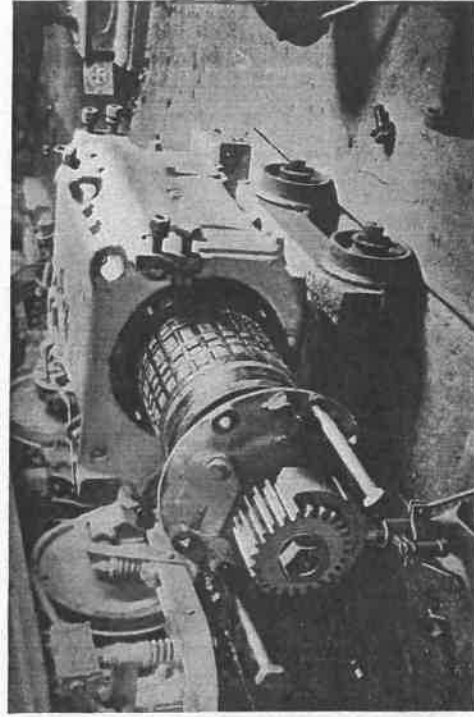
The armature is supported by jacks which can be readily adjusted to take the weight of the armature off the pole pieces
